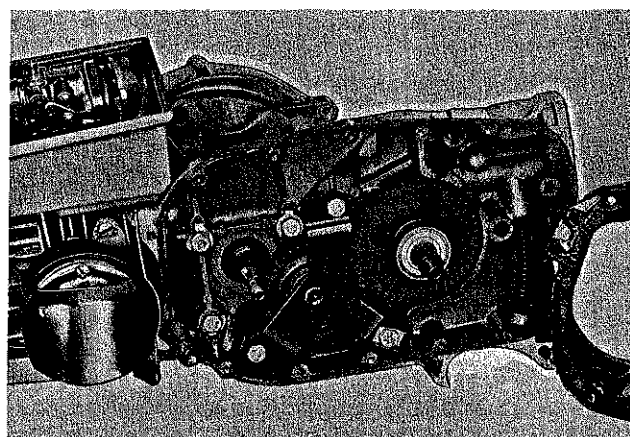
Illustrating the reverse installation of the sprocket shaft assembly for mounting the bar and chain on the right-hand side of the gearcase.
